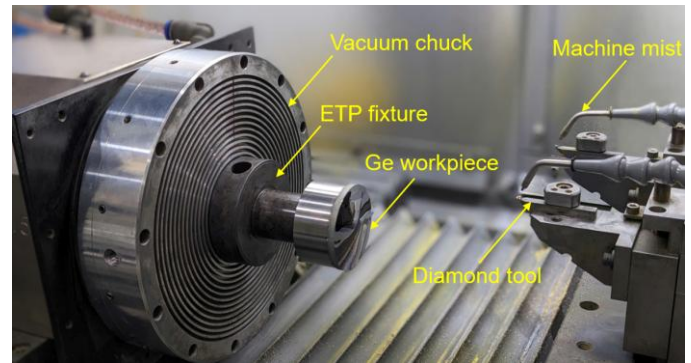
Lathe system, fixtures, tools, and Ge workpiece
